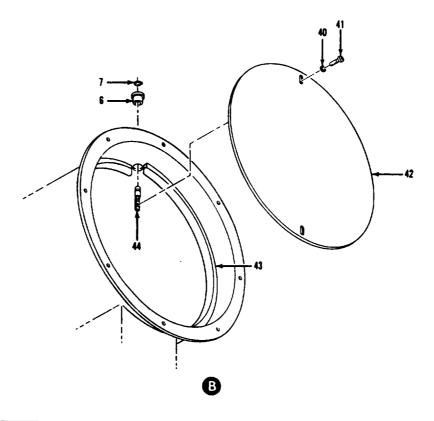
Exhaust Duct Assembly (Sheet 1 of 3)
